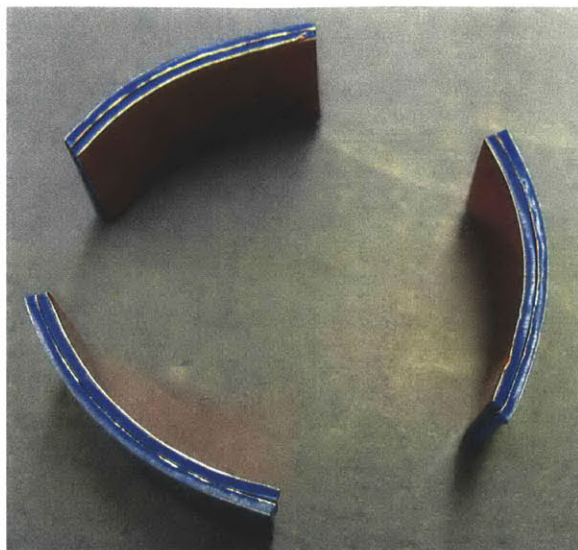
Fabricated laminate rubber bearing with the OD moulding method.
